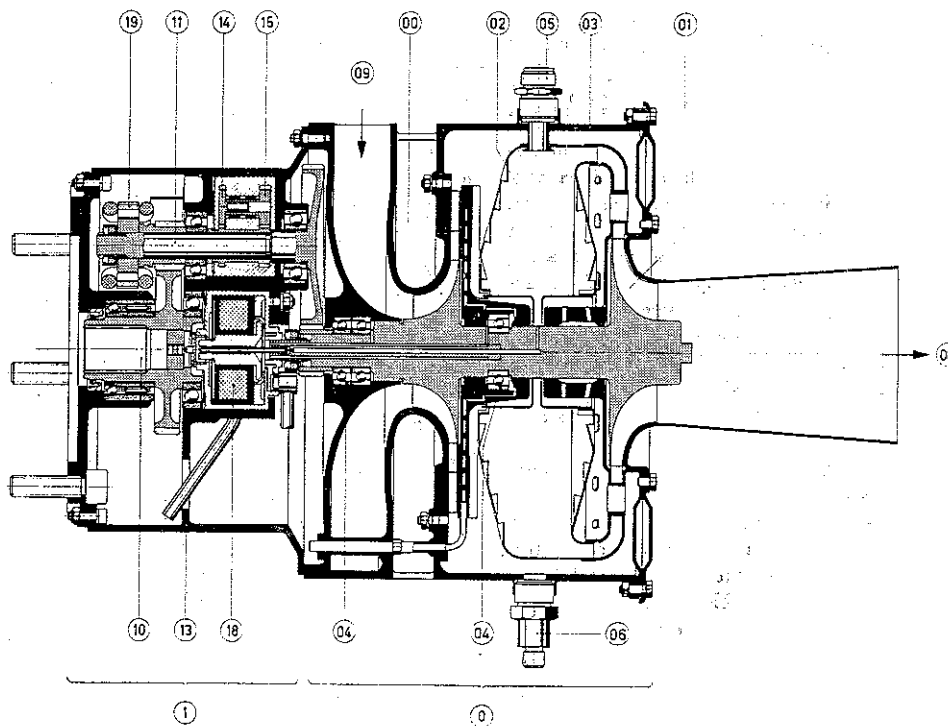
Schematic sectional drawing of GT-15 engine. (0) Turbine section, (1) gearbox section, (00) radial compressor, (01) radial turbine, (02) combustion chamber, (03) turbine casing, (04) bearings, (05) igniter plug, (06) drain valve, (08) exhaust pipe, (09) compressor intake, (10) output gear, (11) layshaft, (13) gearbox casing, (14) primary pump, (15) secondary pump, (18) regulating valve, (19) tachogenerator
